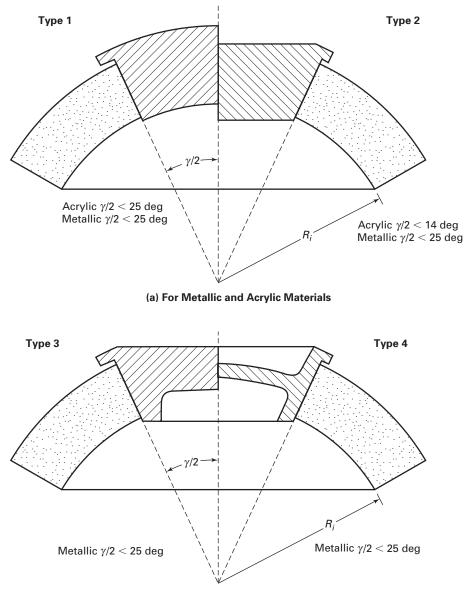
Typical Shapes of Inserts
